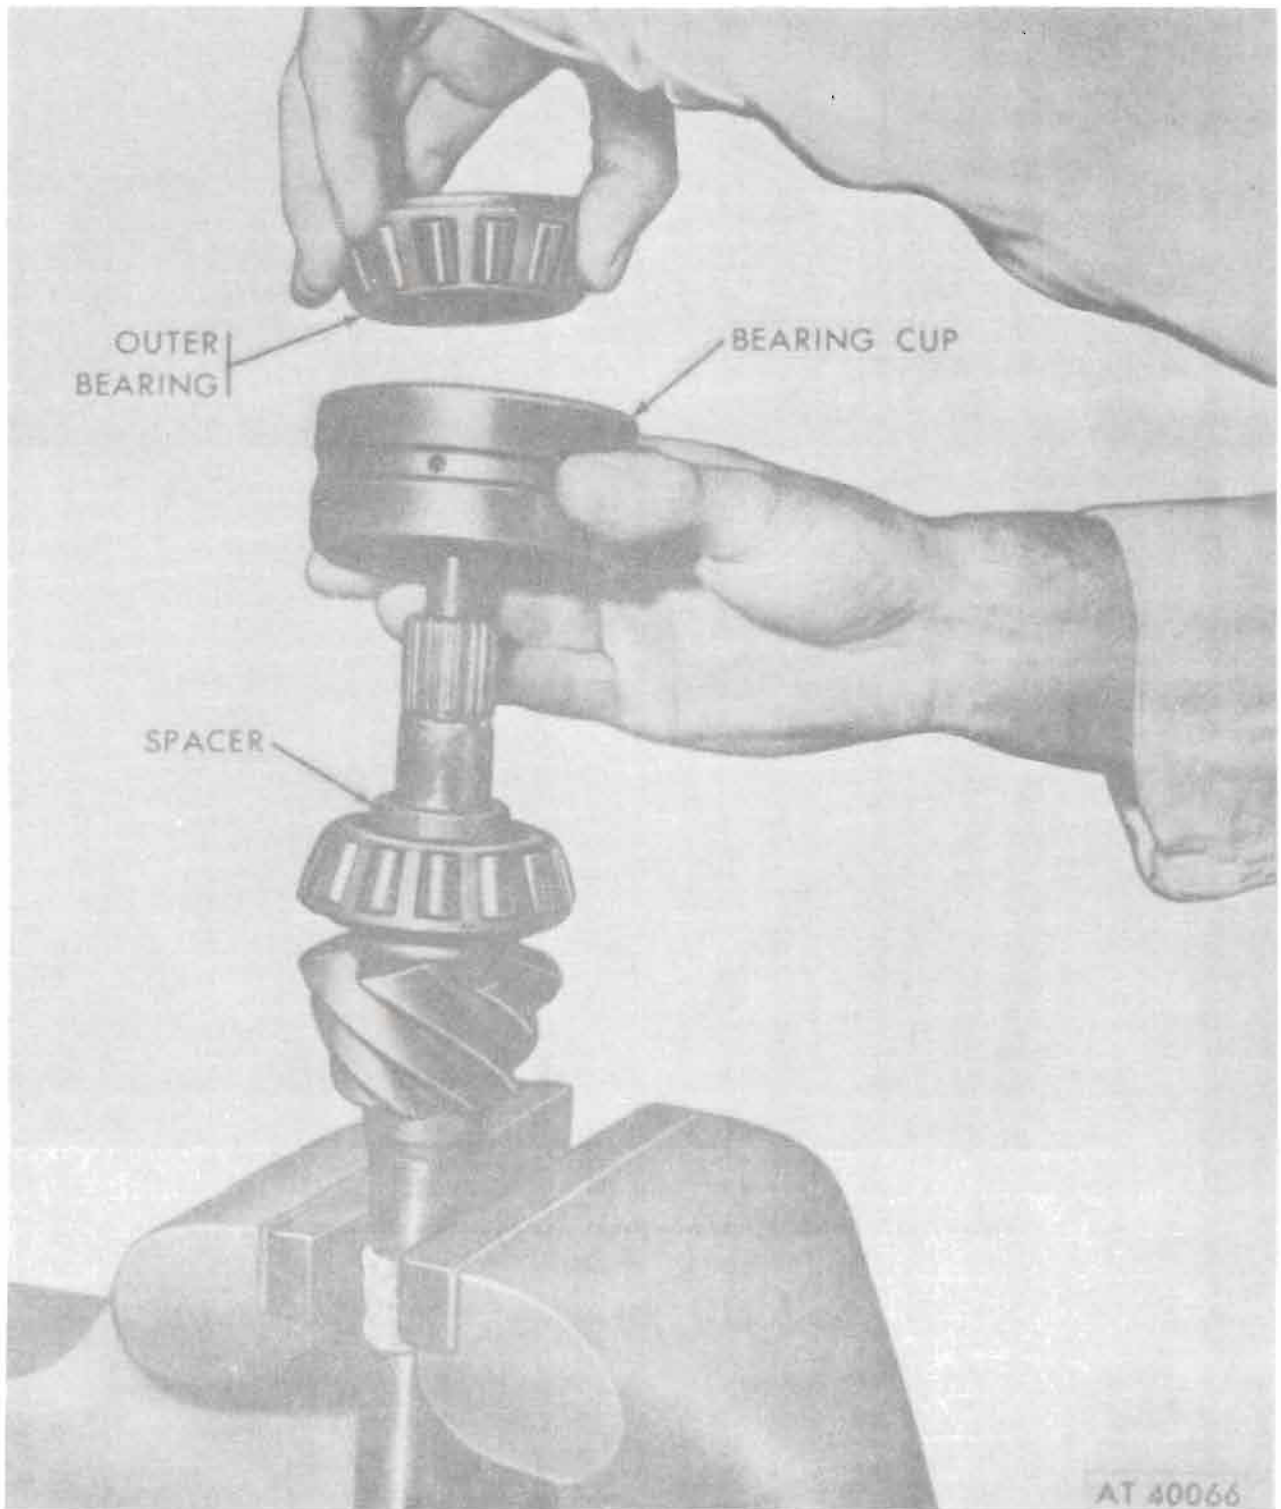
Position of spacer, bearing cup, and outer bearing on shaft.
